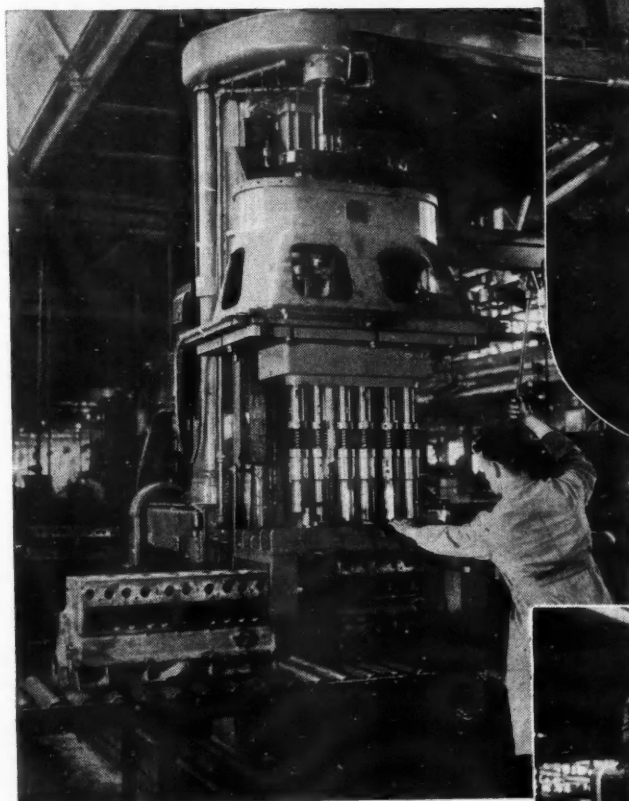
(Right) This Natco drilling machine takes eight, six-cylinder crankshafts in one setting. It completes, in one cycle, all the drilling, tapping, counter-boring, and chamfering operations required at both ends of the crankshaft.
